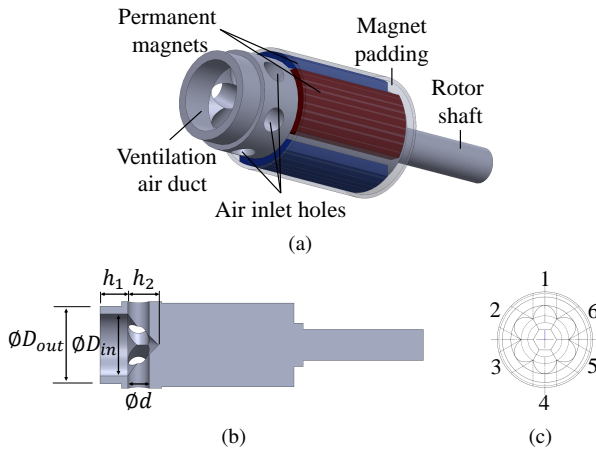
Rotor design of proposed airflow cooling mechanism (a) Rotor assembly structure (b) Section view of rotor core design (c) schematic design of ventilation duct.
